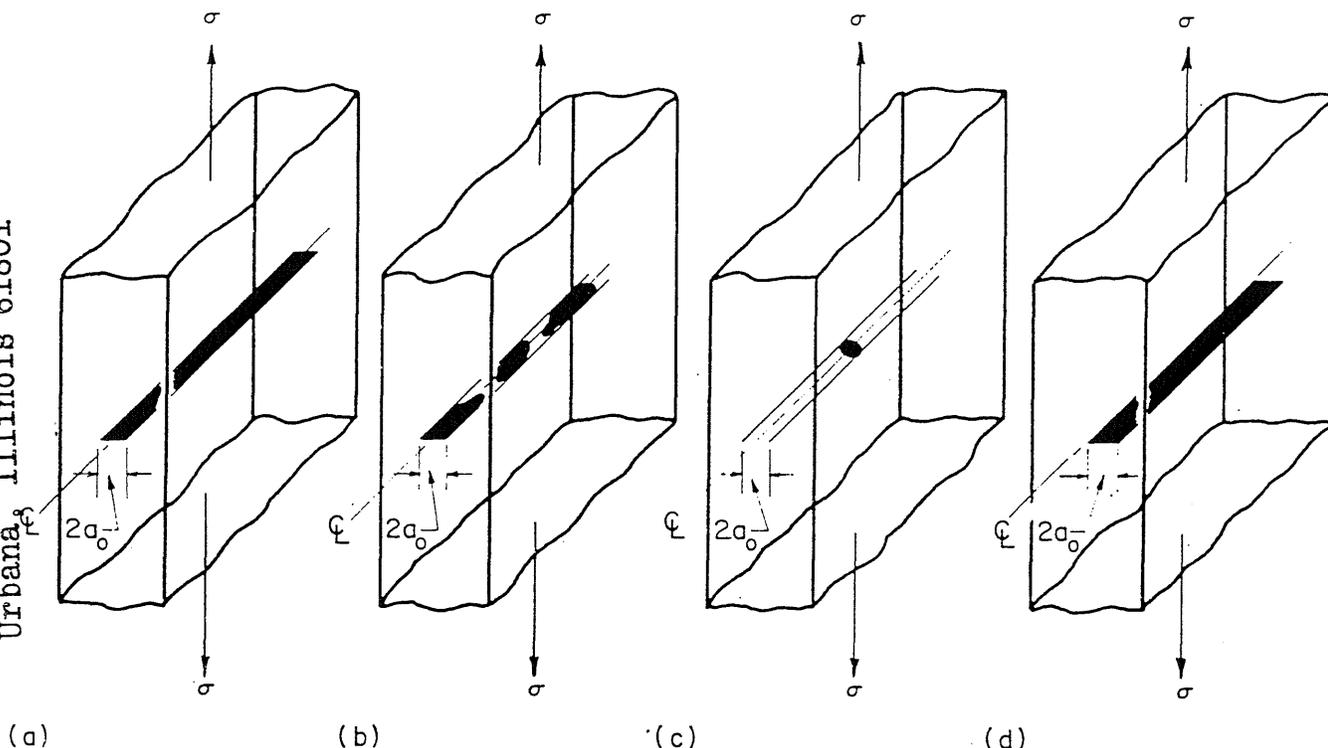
Types of flaws found in weldments: (a) continuous linear defects at the center of the weldment, e.g., lack of fusion, continuous slag; (b) intermittent linear defects at the center of the weldment, e.g., intermittent lack of fusion, intermittent slag, elongated porosity; (c) isolated pores at the center of the weldment, e.g., small voids, pores, very small defects of all kinds; (d) continuous linear defects located off center in the weldment
